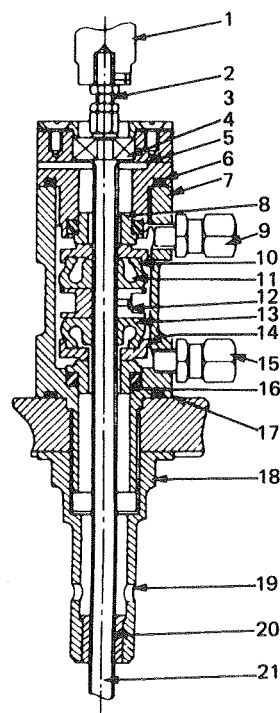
Mechanical seal assembly (Elsworth *et al.*, 1958). (Components; 1, flexible coupling; 2, stirrer shaft; 3, bearing housing; 4, ball journal fit on mating parts; 5, two slots for gland leaks, only one shown; 6, 'O'-ring seal; 7, seal body; 8, stationary counter-face sealed to body with square-section gasket; 9, exit port for condensate, fitted with unequal stud coupling; 10, rotating counter-face; 11, bellows; 12, shaft muff; 13, as 11; 14, as 10; 15, entry port for condensate, as 9; 16, as 8; 17, as 11; 18, shaft bush support; 19, leak holes; 20, Ferobestos bush; 21, ground shaft).
